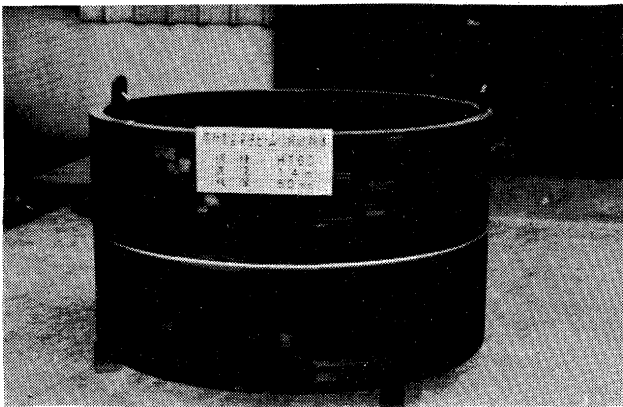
Appearance of welded HT 60 steel pipe (diameter 1.4 m, thickness 50 mm).
